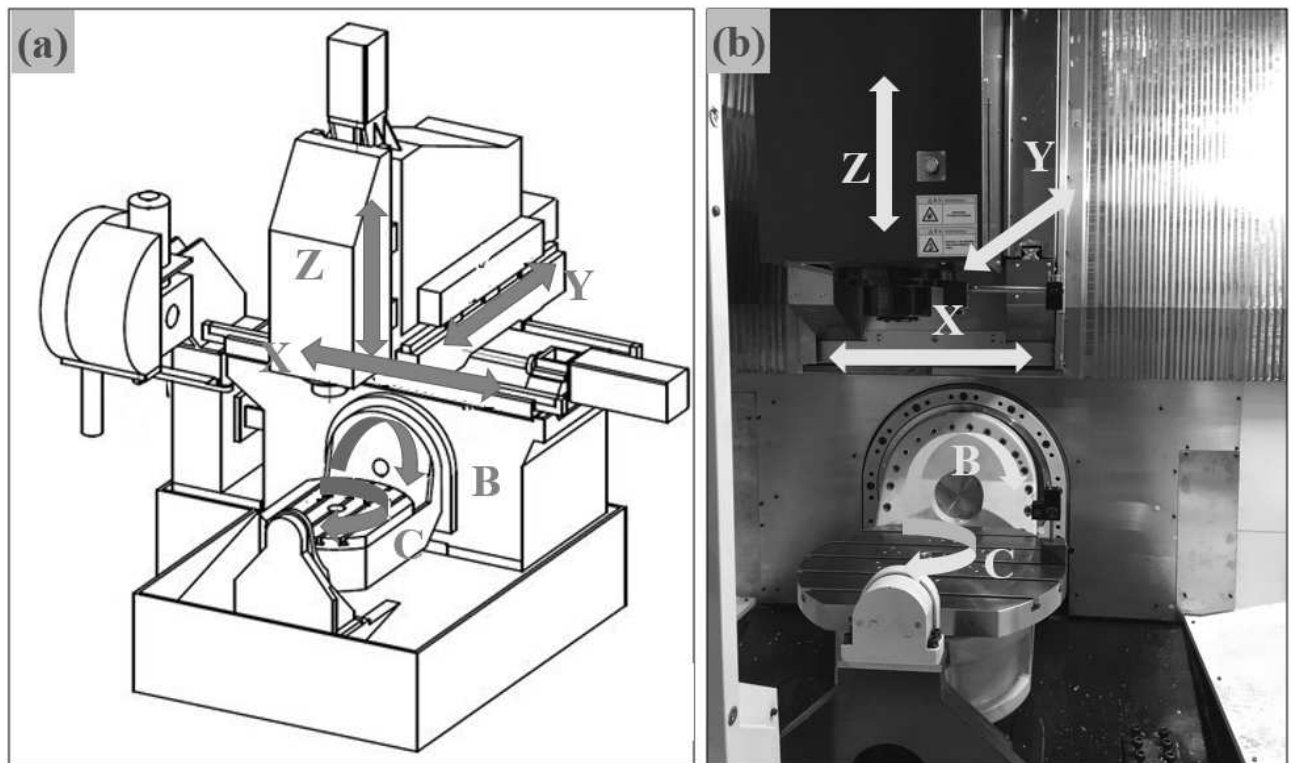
Kinematic relationship of "baby hanging basket" five-axis precision machine tool
